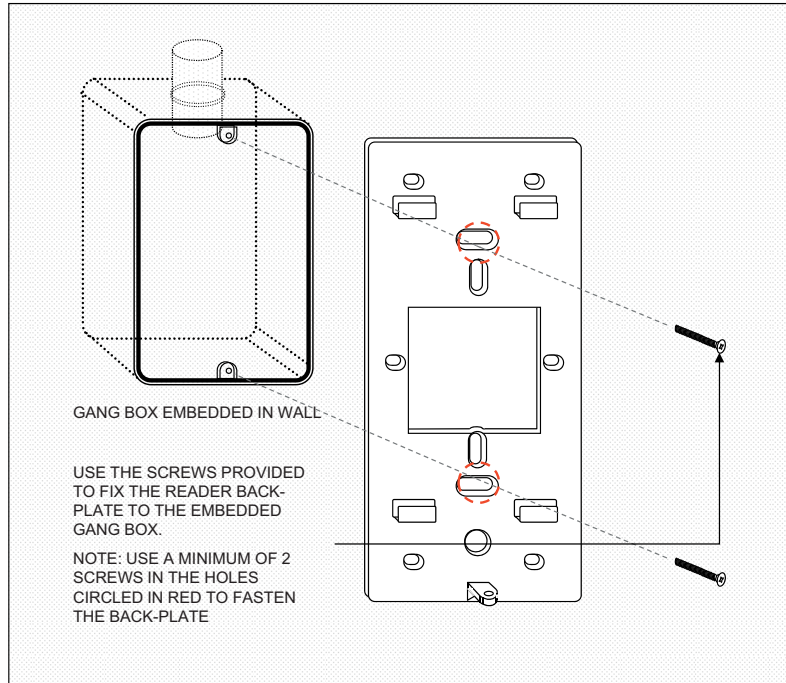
Mounting reader back-plate on concrete wall using gang box and conduit
